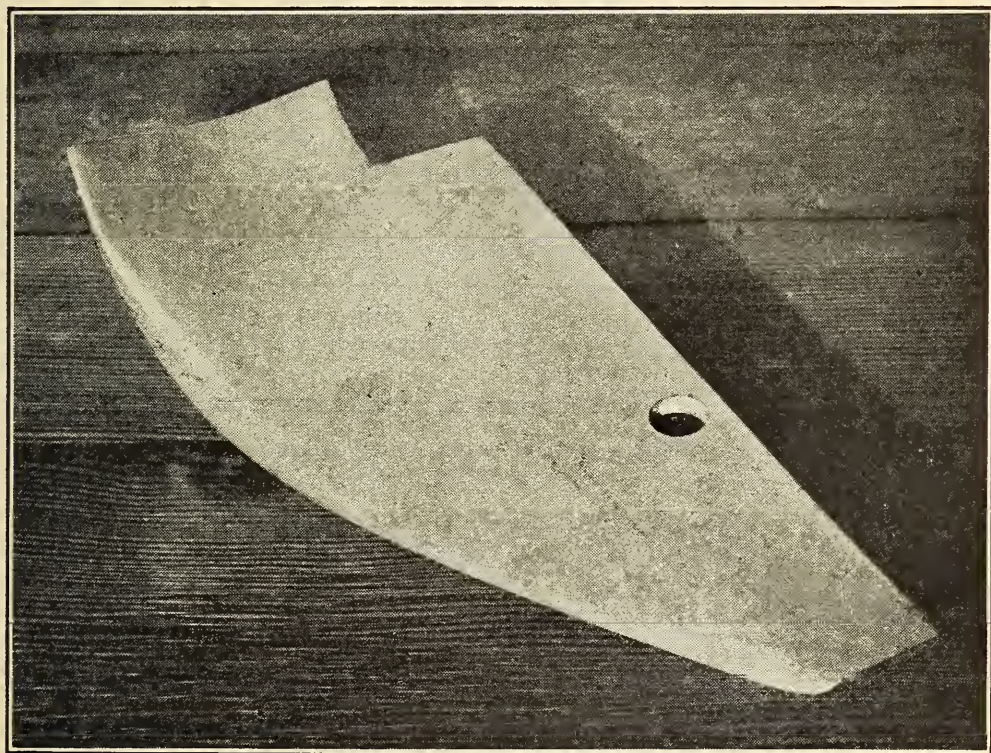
Elevating chute, Massey-Harris corn binder
